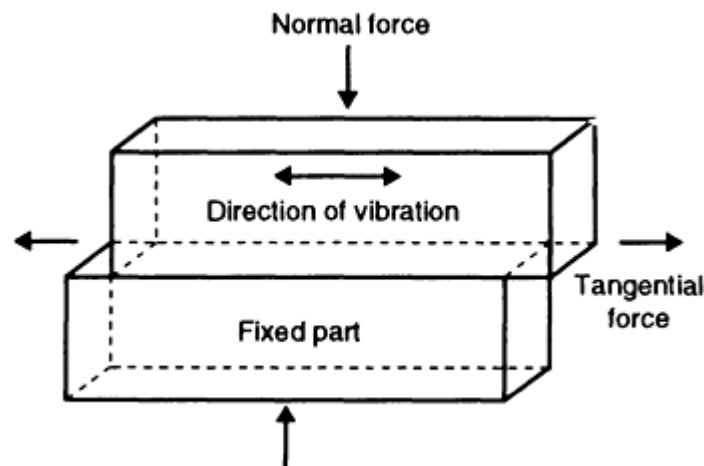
SCHEMATIC OF VIBRATION WELDING PROCESS
